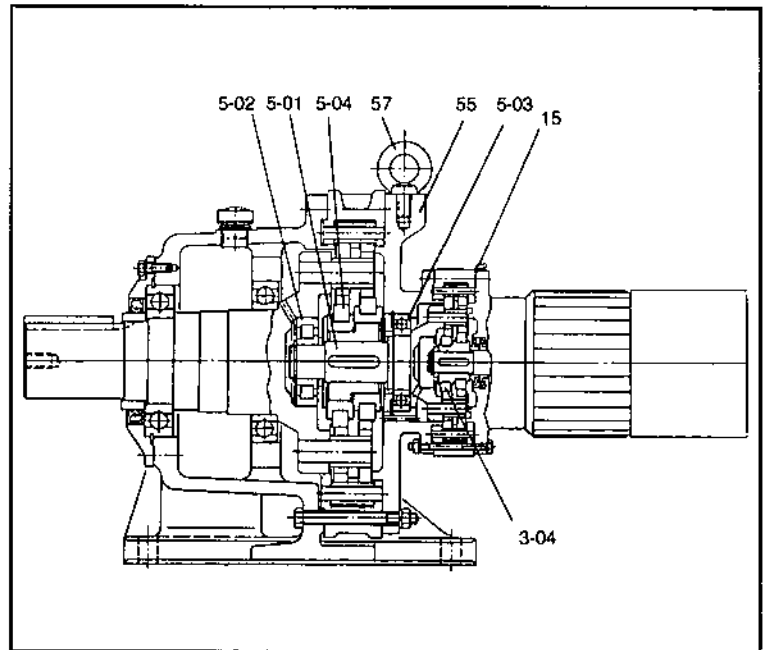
Gearmotor/Single Disc Type (Frame Size 4075-4095)
